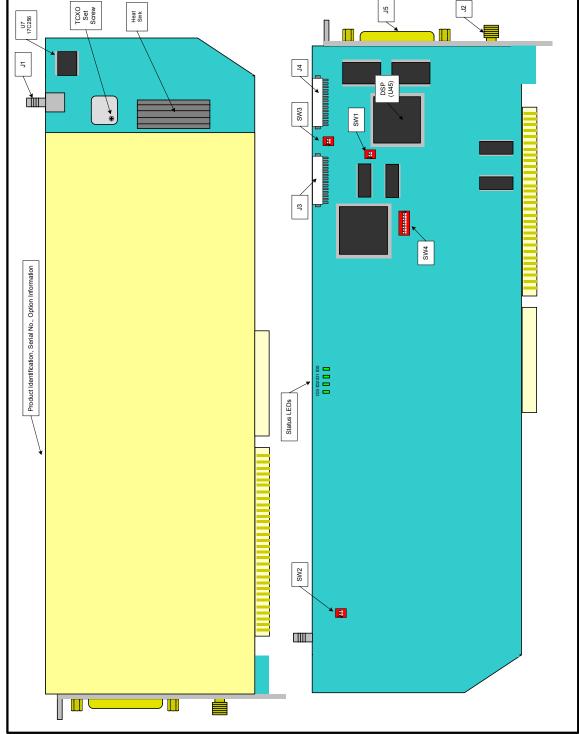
LS-25/LS-25-D ISA Outline Drawing
